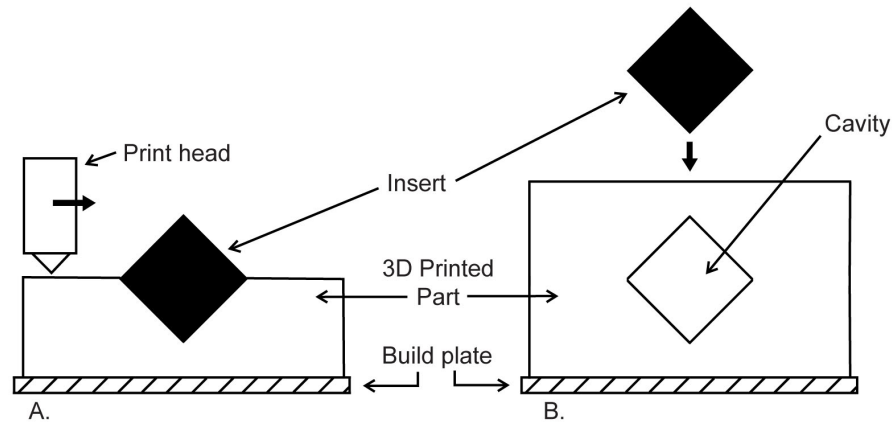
Issues with inserting complex components (a) Print head collides with protruding insert.(b) Insert cannot be embedded until the build is as tall as the insert, but by that point the cavity could be enclosed when parts have convex tops.
